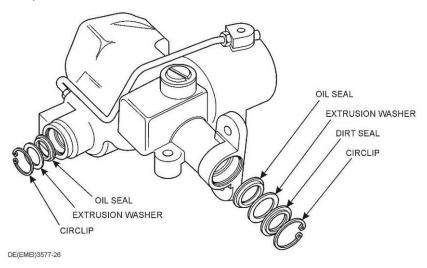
Removal of the Sector Shaft and Input Shaft Seals
